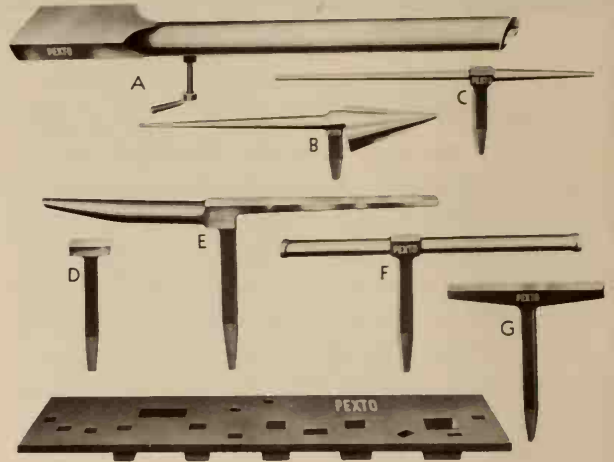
Sheet metal stakes: (A) hollow mandrel; (B) blowhorn; (C) candle mould; (D) common square; (E) beakhorn; (F) double seaming; (G) hatchet; (H) stake plate. (Peck, Stow & Wilcox Co.)
